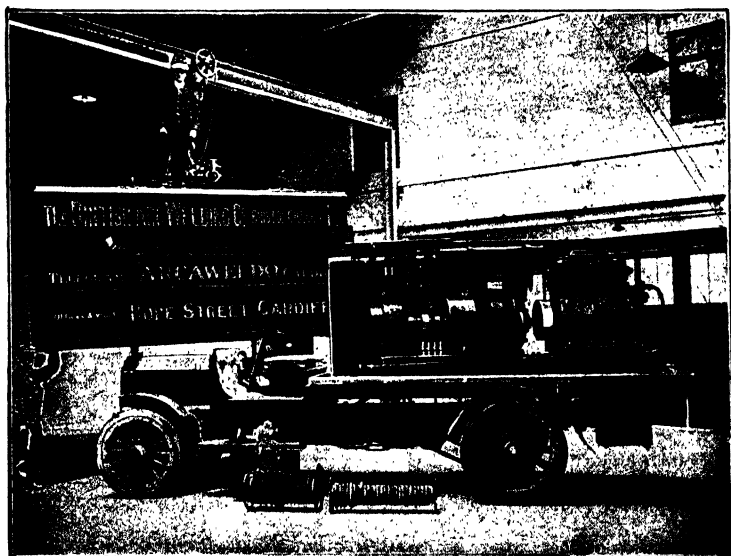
MOBILE WELDING PLANT WITH ASTER-WESTINGHOUSE GENERATING SET.
